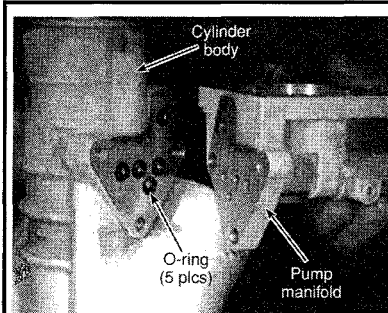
Lubricate five new O-rings and install them into the cylinder body
